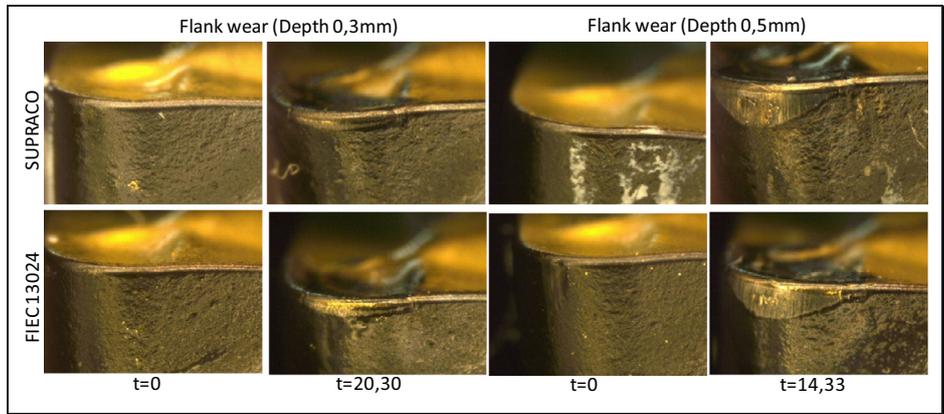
Flank wear obtained with the reference cutting fluid (up) and new developed fluid (down), when using a cutting depth of 0.3 mm (left) and cutting depth of 0.5 mm (right).
